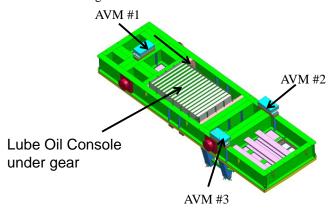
Bottom view of wide flange beam base with lube oil console under the gear
